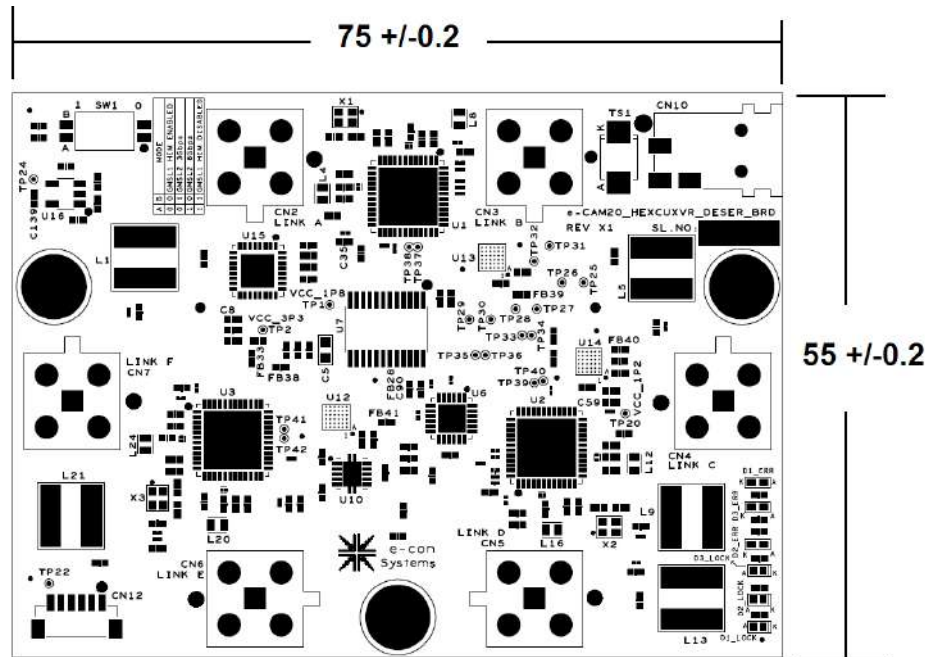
NileCAM21\_CUXVR Deserializer Board Front View
